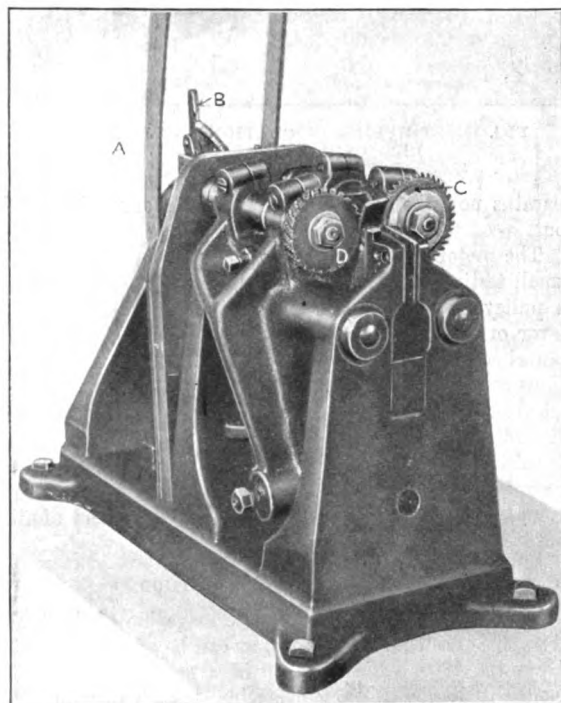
SPECIAL MILLER FOR SLOTTING CHASER BLOCKS
